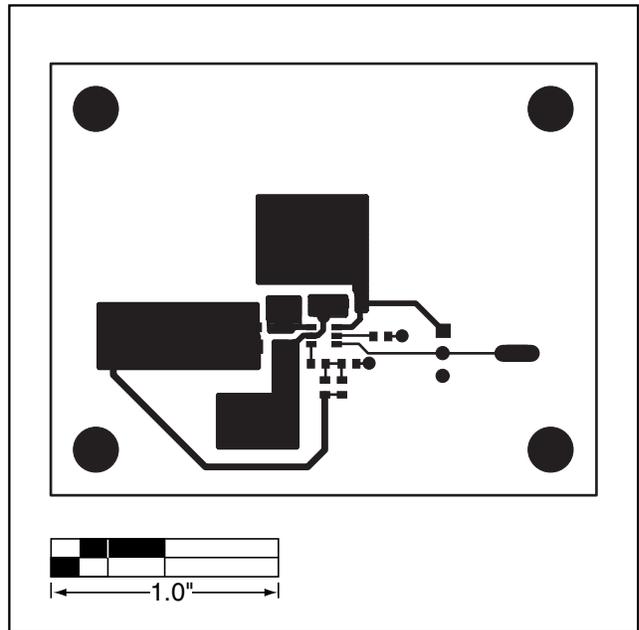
MAX1896 EV Kit PC Board Layout—Component Side
